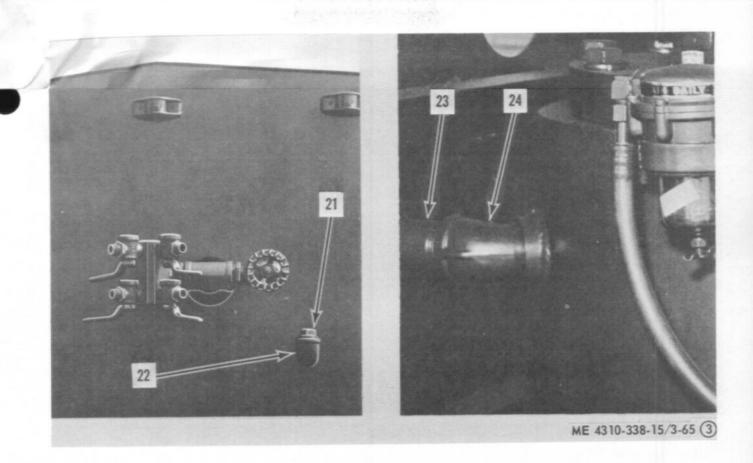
Compressor oil lines and fittings, removal and installation (sheet 3 of 3).
